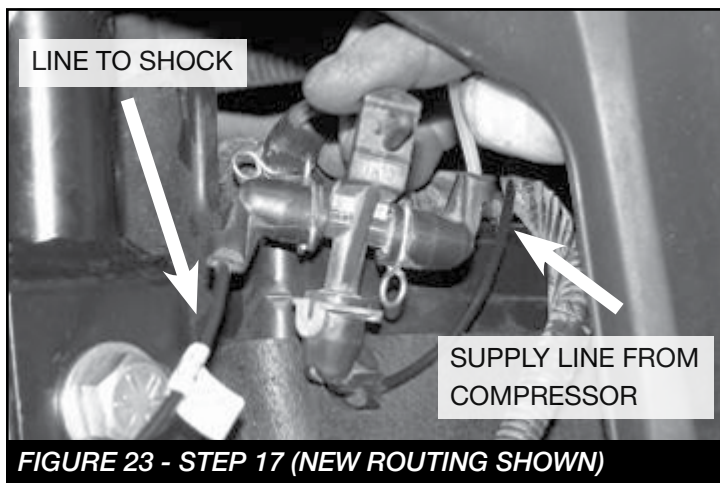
STEP 17 (NEW ROUTING SHOWN)
